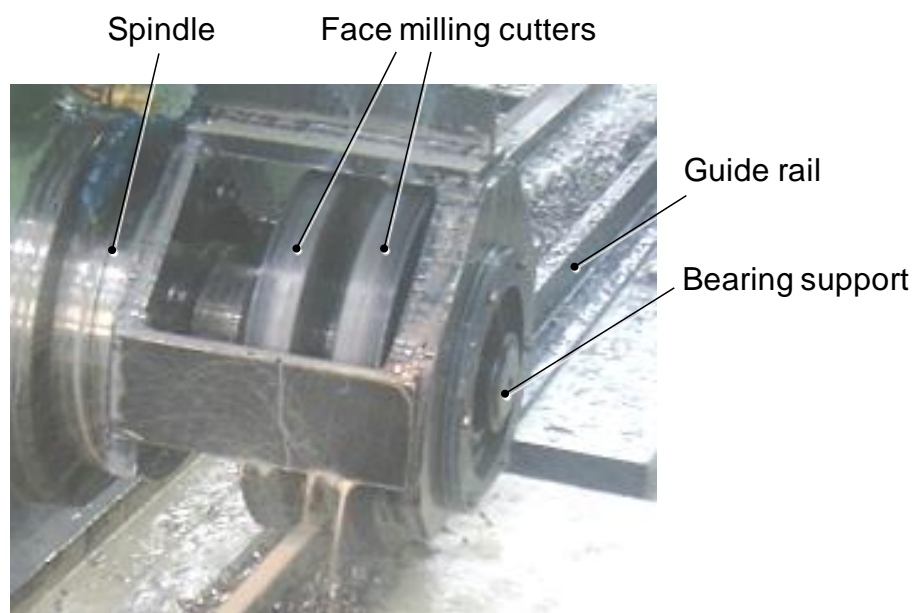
16 Double side milling of a guide rail with a set of combined face milling cutters.
